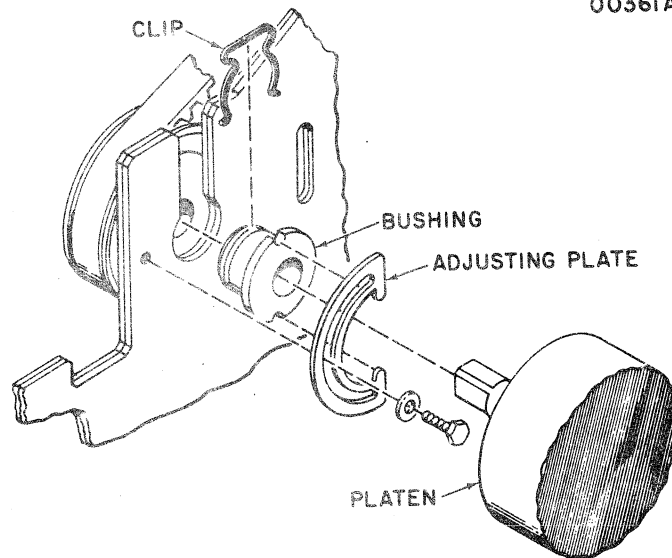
PIN FEED PLATEN ASSEMBLY PARALLELISM
